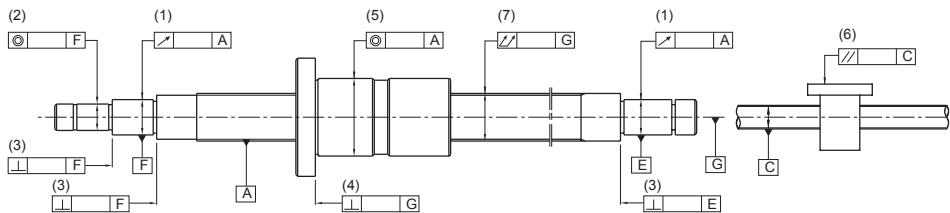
Mounting Accuracy and Tolerance
